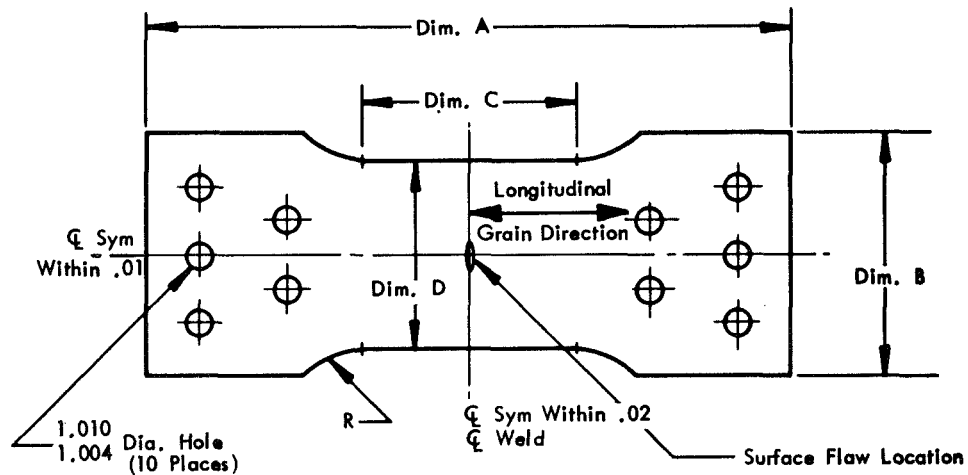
SURFACE FLAW SPECIMEN FOR 5AL-2.5Sn (ELI) TITANIUM
